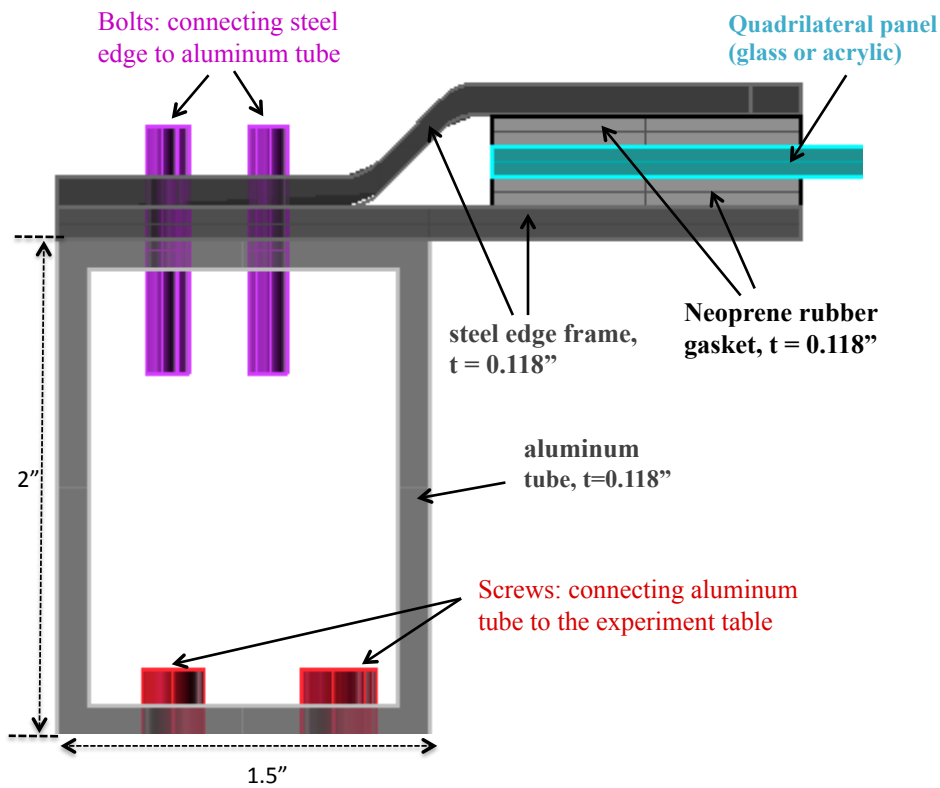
Cross-section of the edge frame: Steel edge, aluminum tube, neoprene strips and quadrilateral panel
